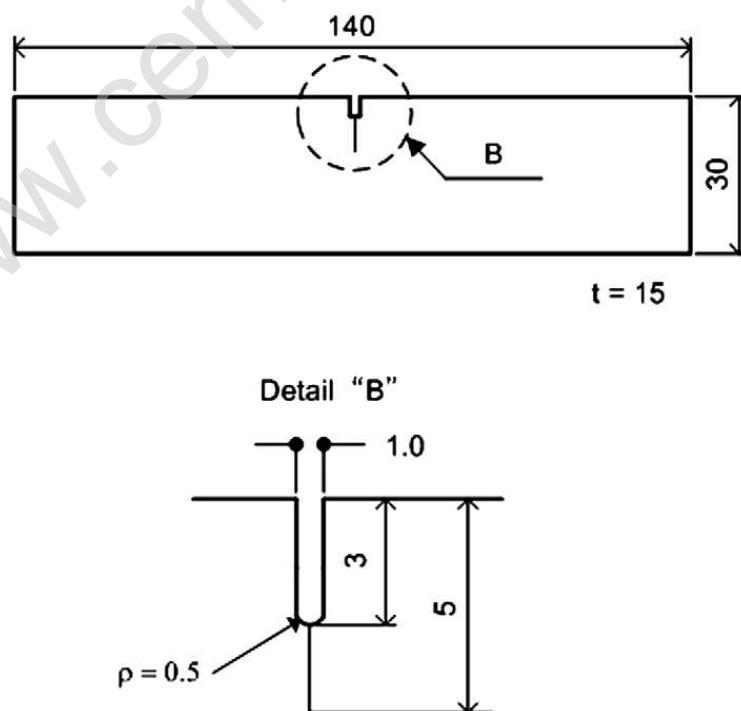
Geometry and dimension of SEB specimen of SC450 steel (unit: mm).
